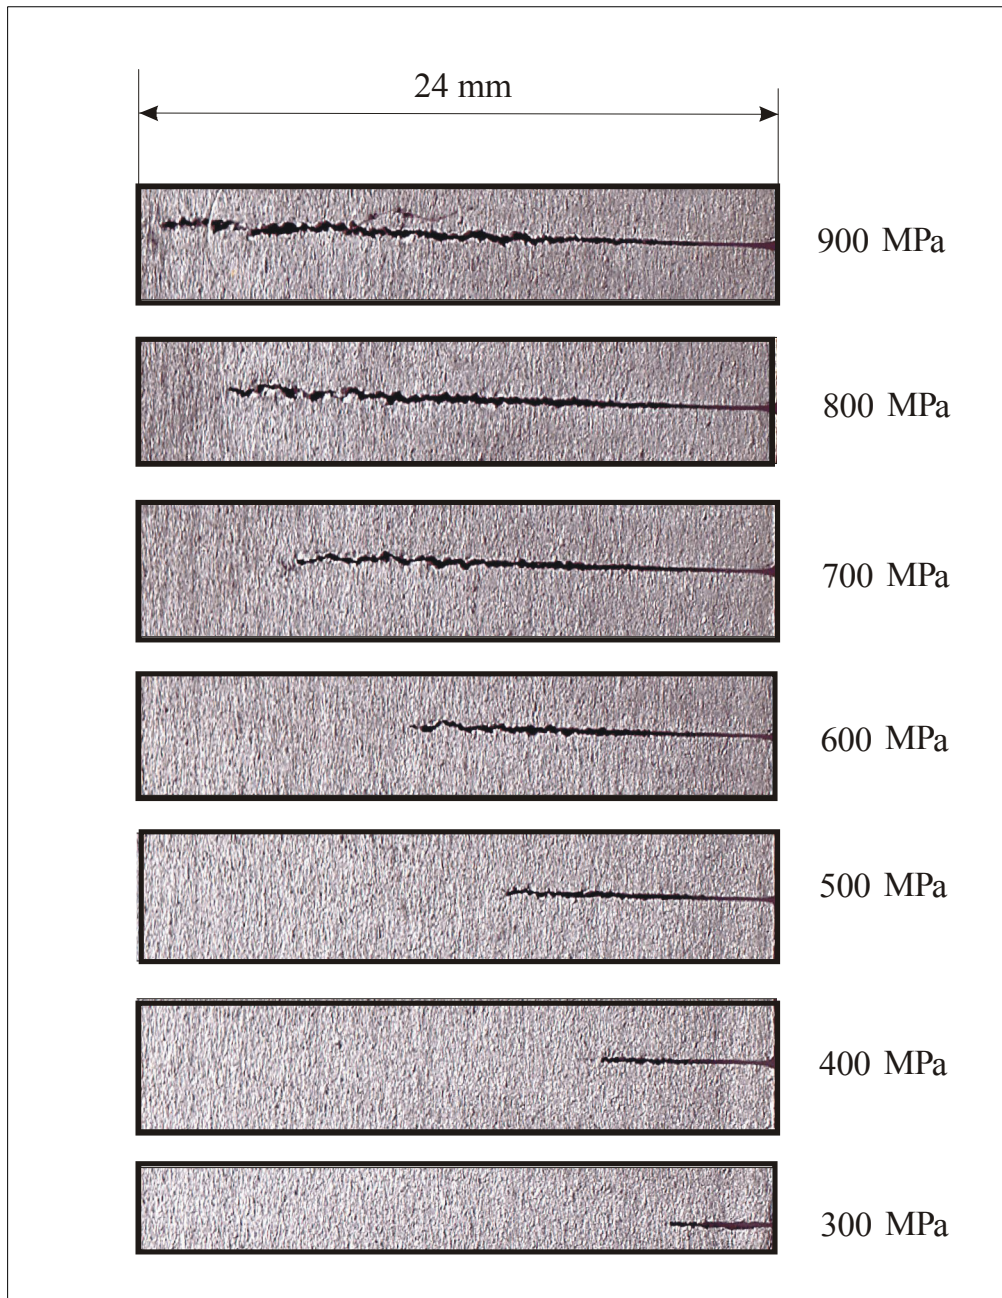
Photographically bottom face cutting aluminium with WJ up to 900 MPa.
